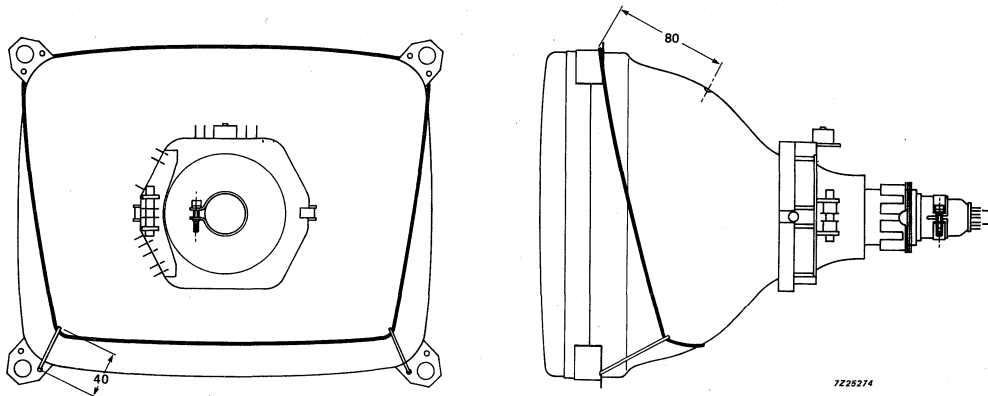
Position of degaussing coil on the display tube; dimensions are given in mm.
